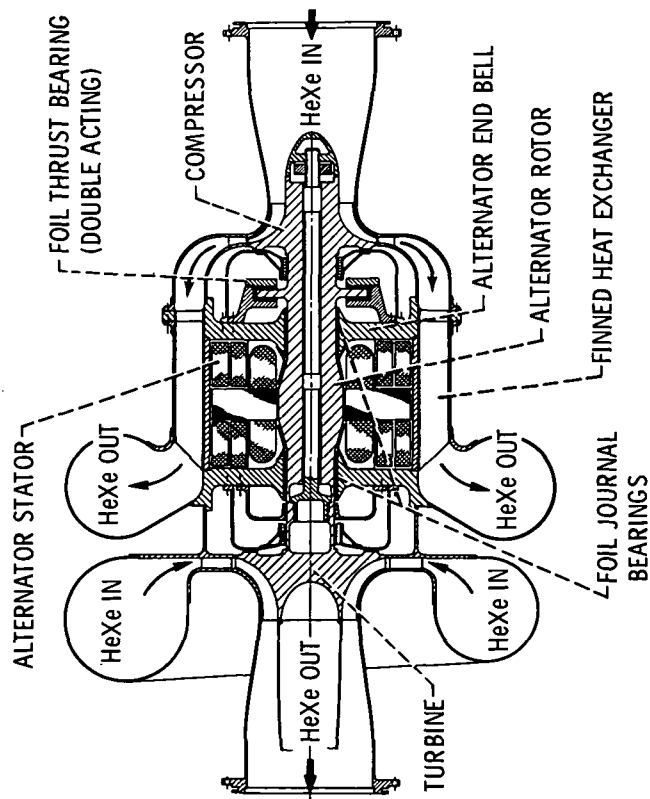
Brayton Rotating unit cooled with compressor discharge gas.
